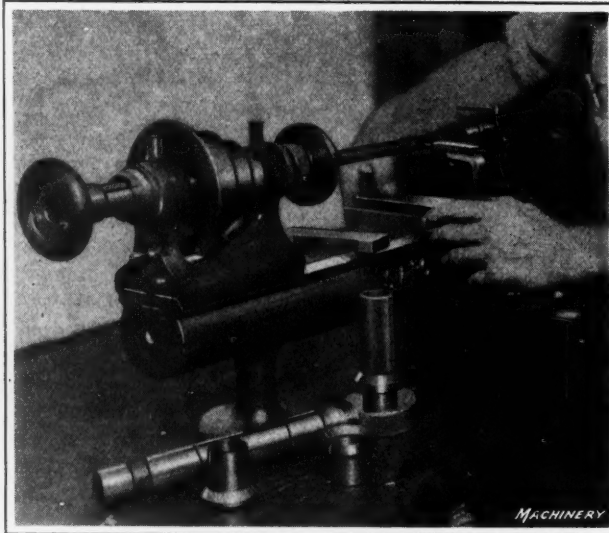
Testing Assembled Lathe for Alignment, using Test Bar and Koch Indicator
